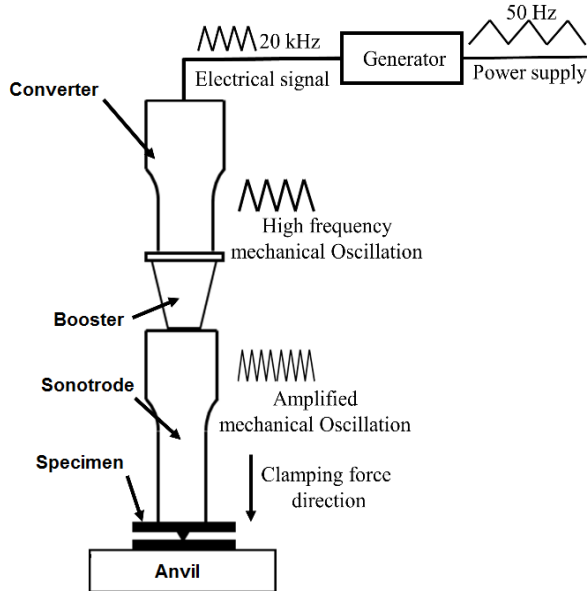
The basic parts of ultrasonic welding apparatus [9].
